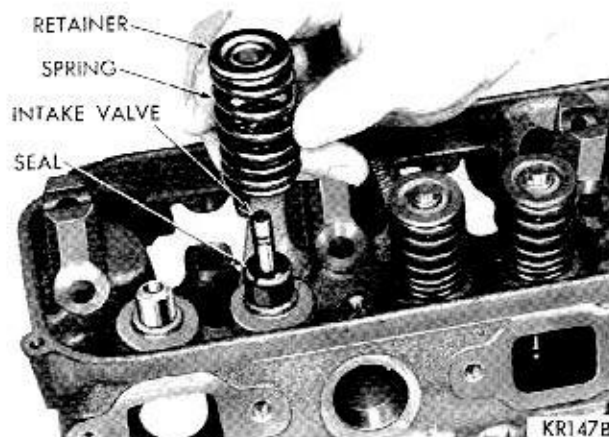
Installing Valve, Spring, Cup Seal and Retainer
